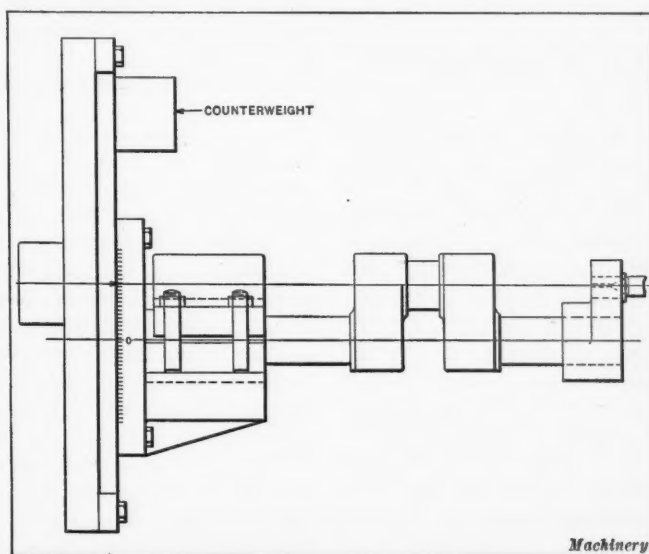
Crankshaft Fixture in Offset Position for turning Crankpin
